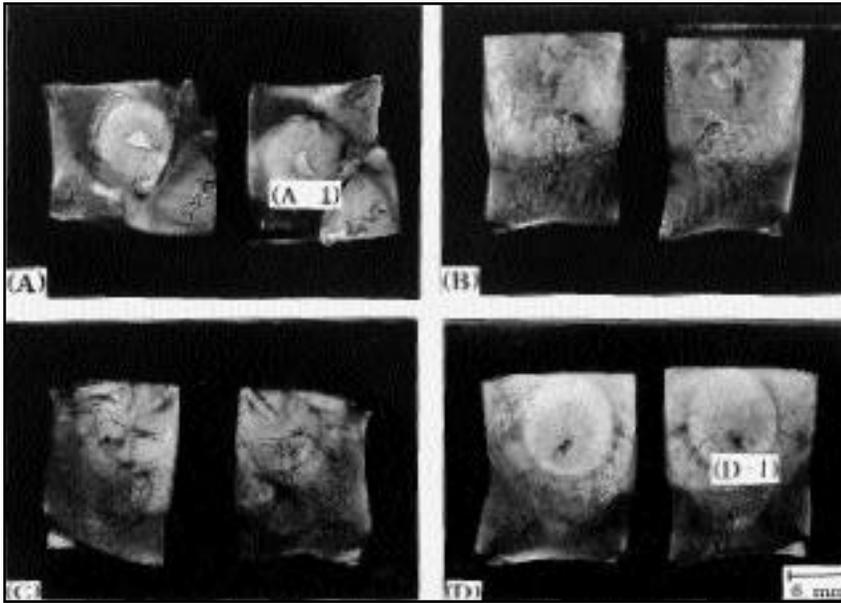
Fractured surfaces of specimens with internal cracks after fatigue testing at 35 kgf/mm² stress range (each specimen was overloaded by 35 kgf/mm² stress range in order to fracture the specimen artificially).
